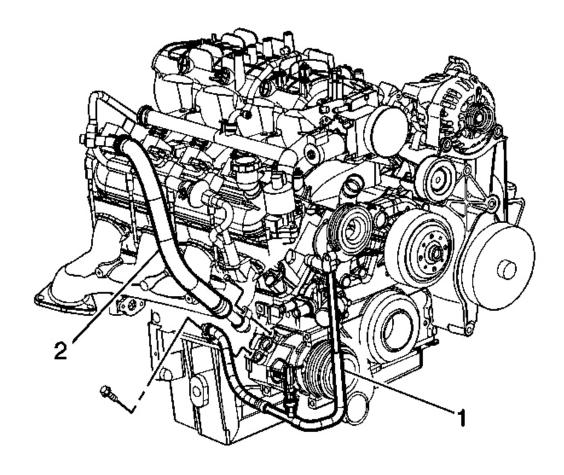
Identifying Suction/Discharge Hoses To A/C Compressor Courtesy of GENERAL MOTORS CORP.
